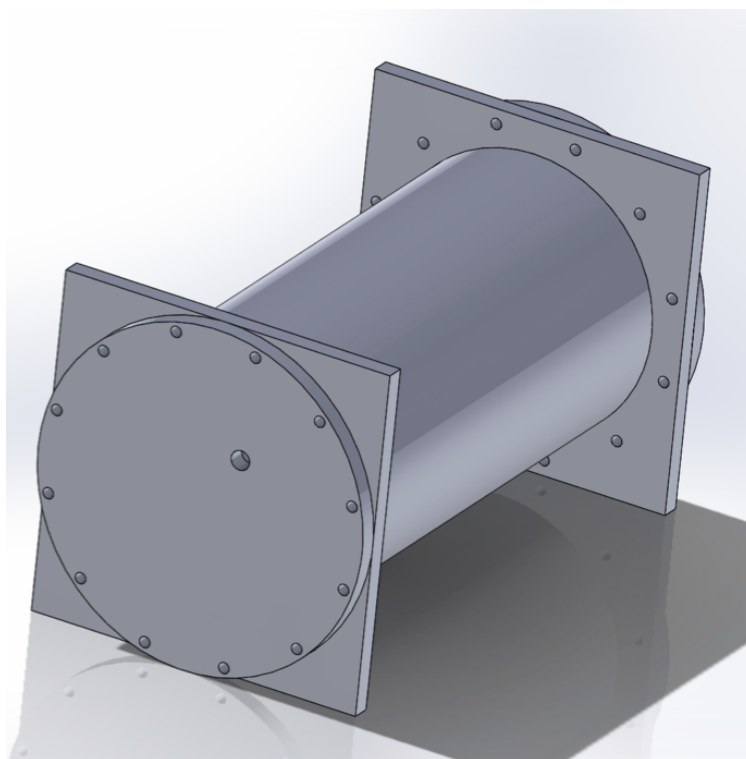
SOLIDWORKS image of the fully assembled vacuum pressure vessel. Image displays aluminum tube and circular end plates mounted to rectangular flanges. End plate through-wall connectors and hex head bolts are not shown.
